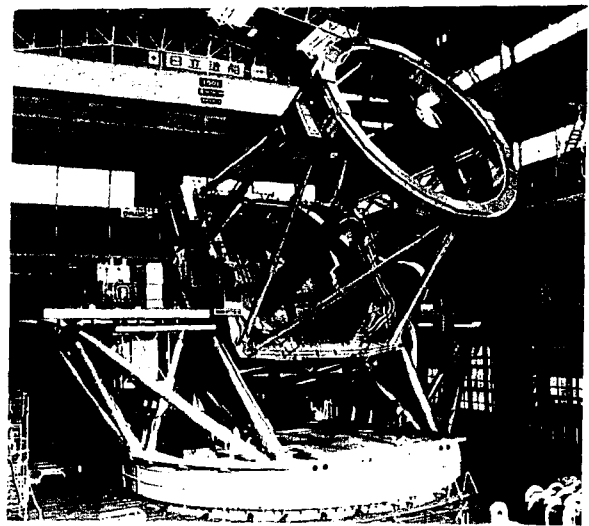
Subaru telescope under assembling test at a factory in Osaka, Japan
